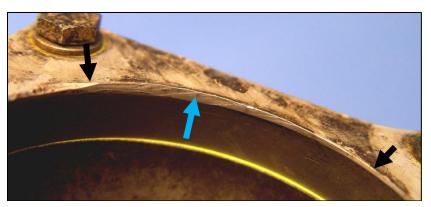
The right rear edge of the #1 bearing rear flange indicated by the blue arrow in Figure 63.
